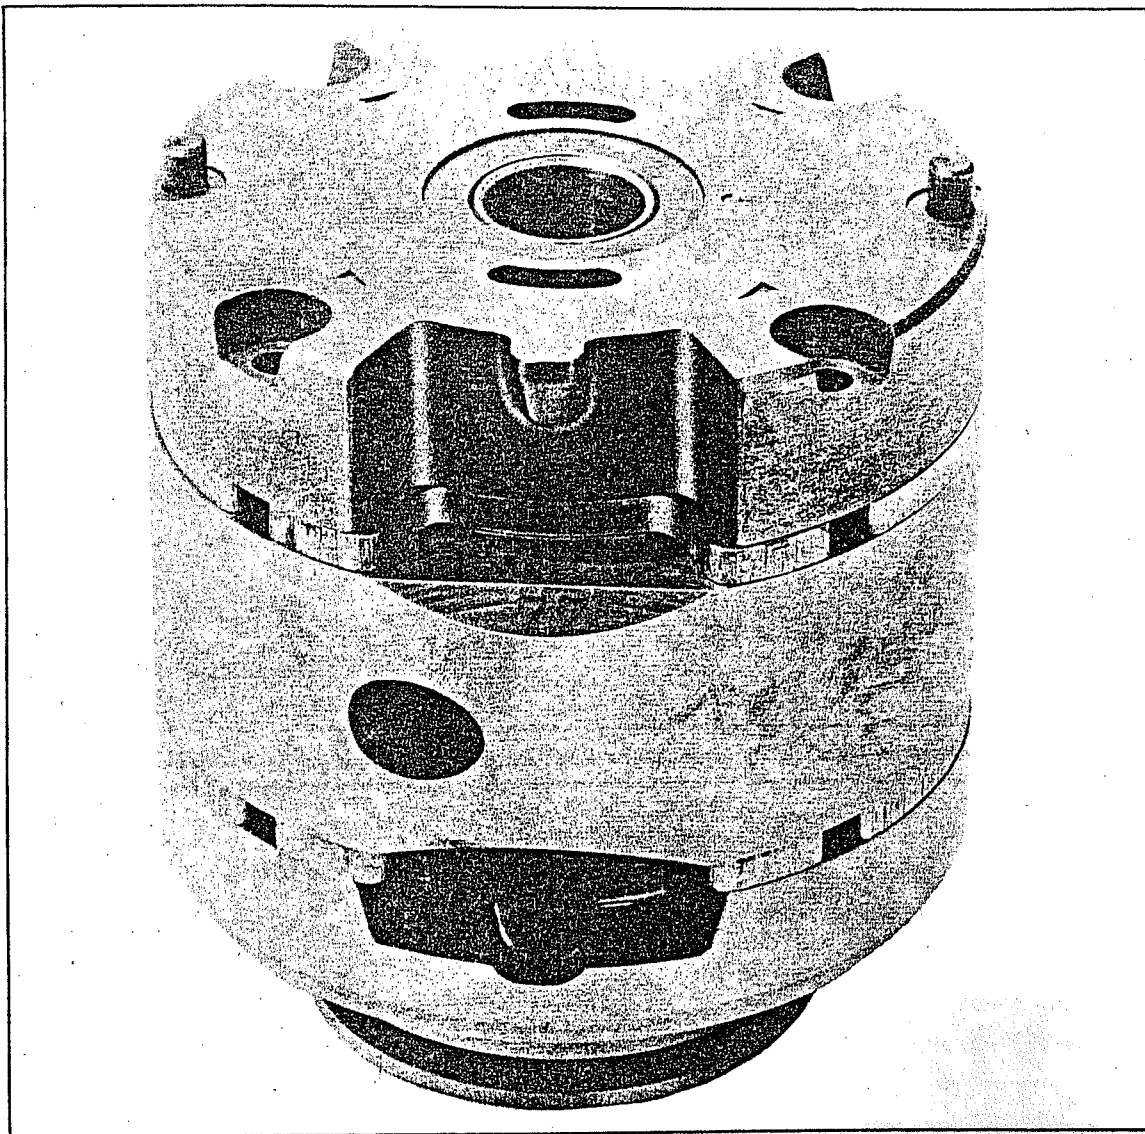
Cartridge ready for Installation of Socket Head Screws.
